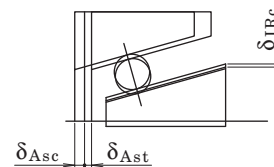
4c Change of dimension due to centrifugal expansion of inner ring raceway
